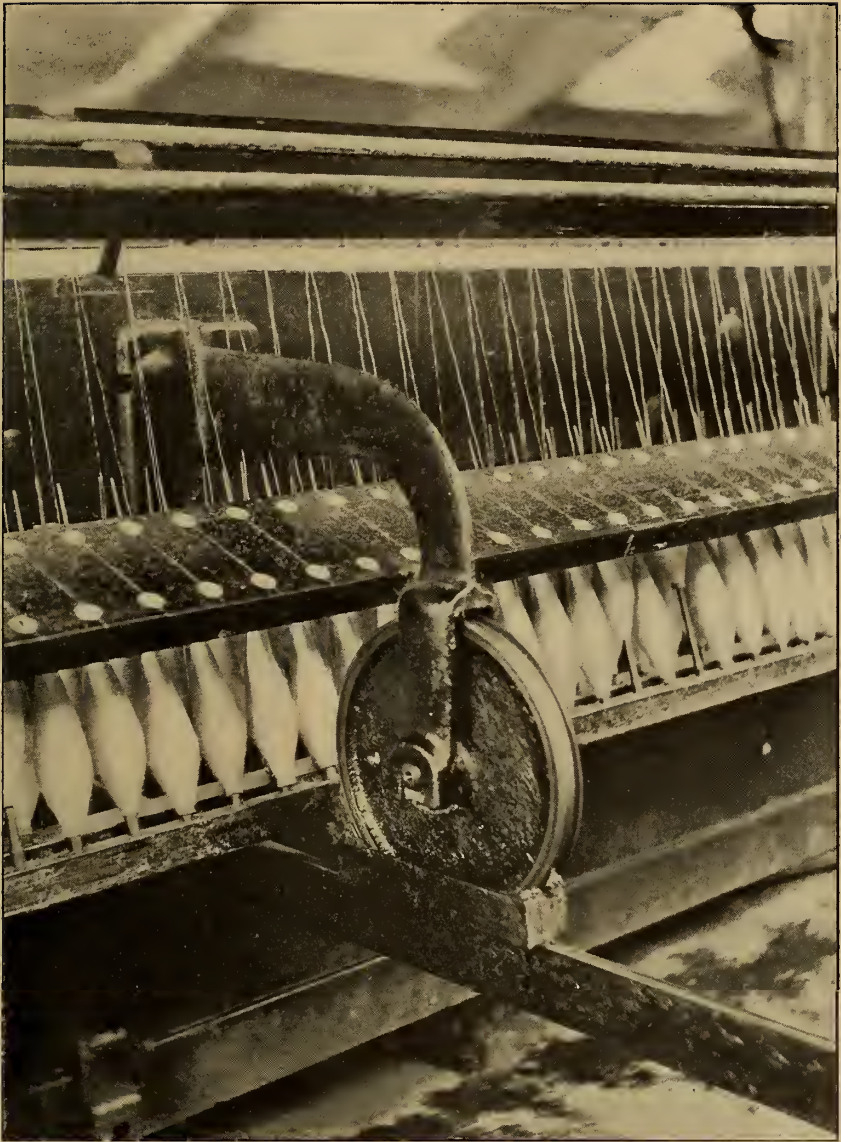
TWINER CARRIAGE WHEEL AND GUARD
